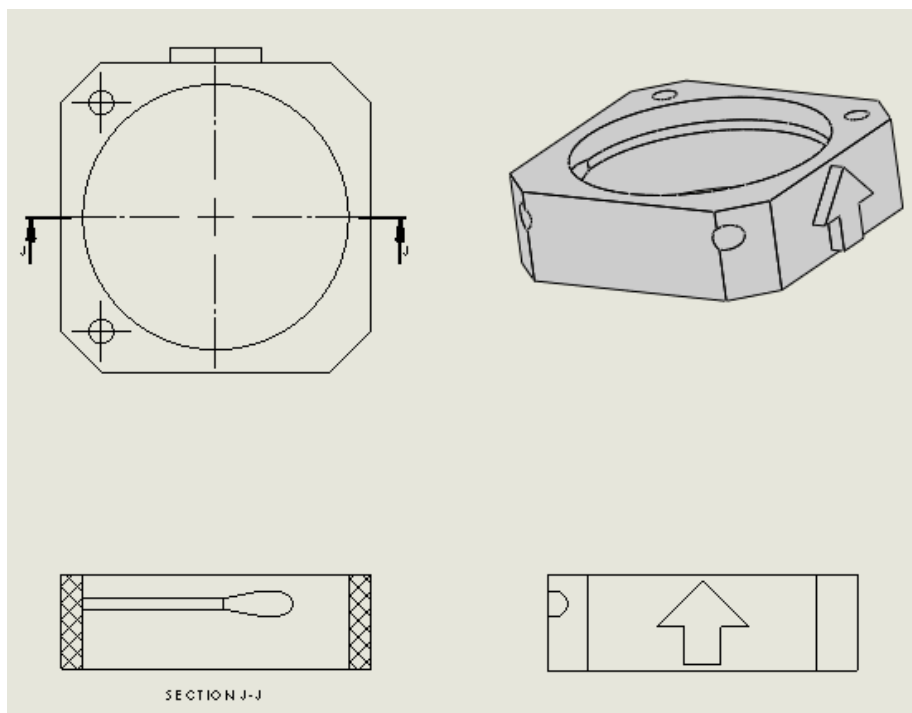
Cross-section of motor engine control unit with groove and direction arrow.
